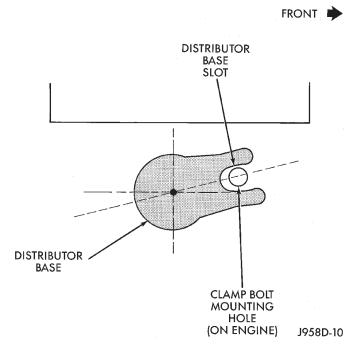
Distributor Engaged Position—4.0L 6-Cylinder Engine
